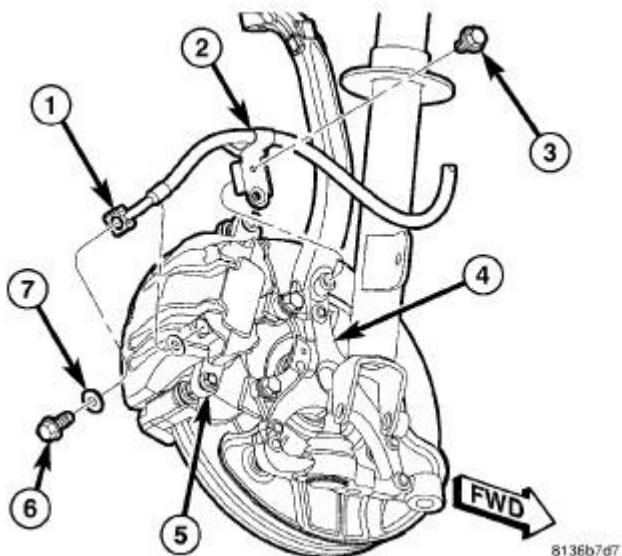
FRONT BRAKE FLEX HOSE AT CALIPER
